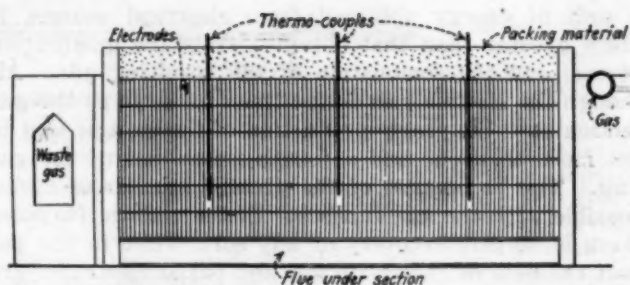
ELEVATION OF SECTION OF LONGITUDINAL TYPE OF FURNACE, SHOWING LOCATION OF THERMOCOUPLES
